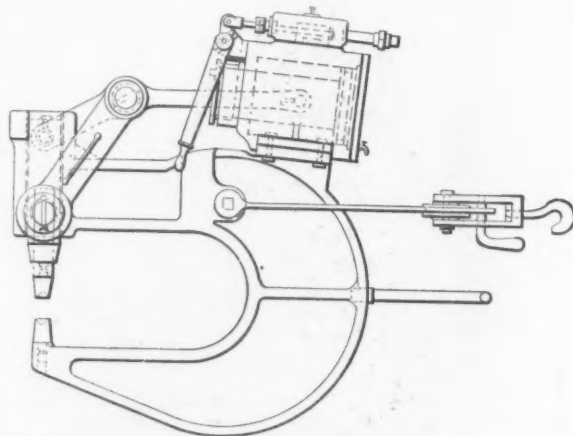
A Pittsburgh Riveter, an Example of a Straight Toggle-Joint Machine.
